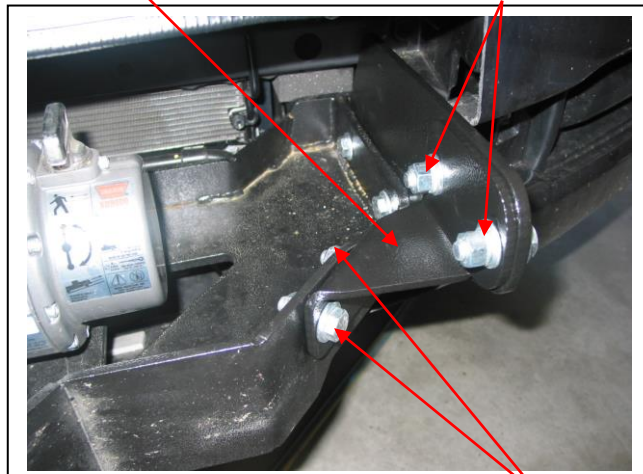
Passenger side shown ½ x 1 ½ bolts/nuts and washers
